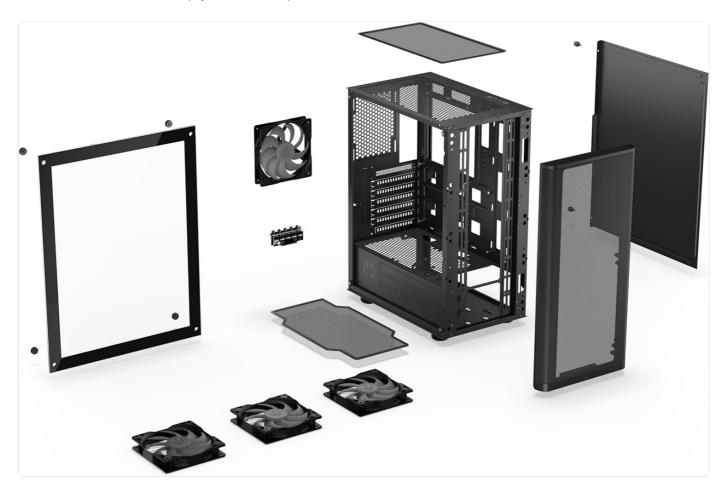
An exploded view of the ENDORFY Ventum 200 ARGB case, illustrating its various components including the chassis, tempered glass side panel, mesh front panel, top and bottom dust filters, and individual fans.
